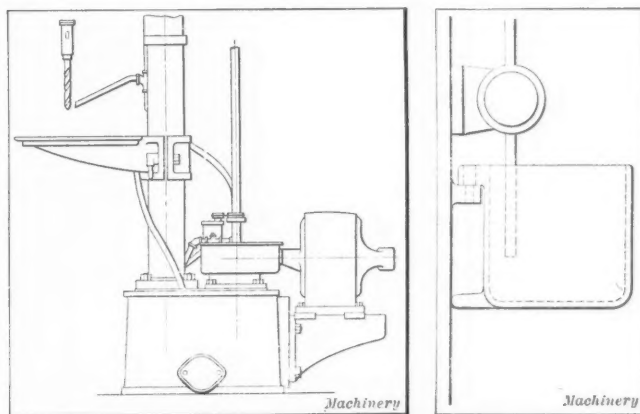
Base of Drilling Machine used for Lubricant Tank
